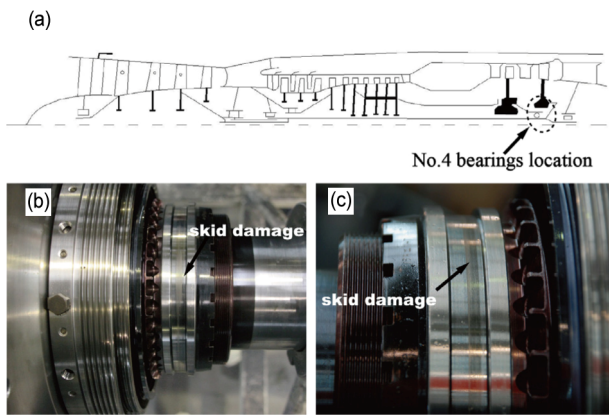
Cylindrical roller bearing on mainshaft of aeroengine: (a) schematic diagram of installation position; (b) skid-damaged area; (c) alternate angle of skid damage shown in another roller bearing.
